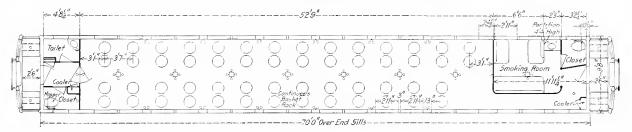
Floor Plan of Chicago, Burlington & Quincy Chair Car Shown in Fig. 153.
